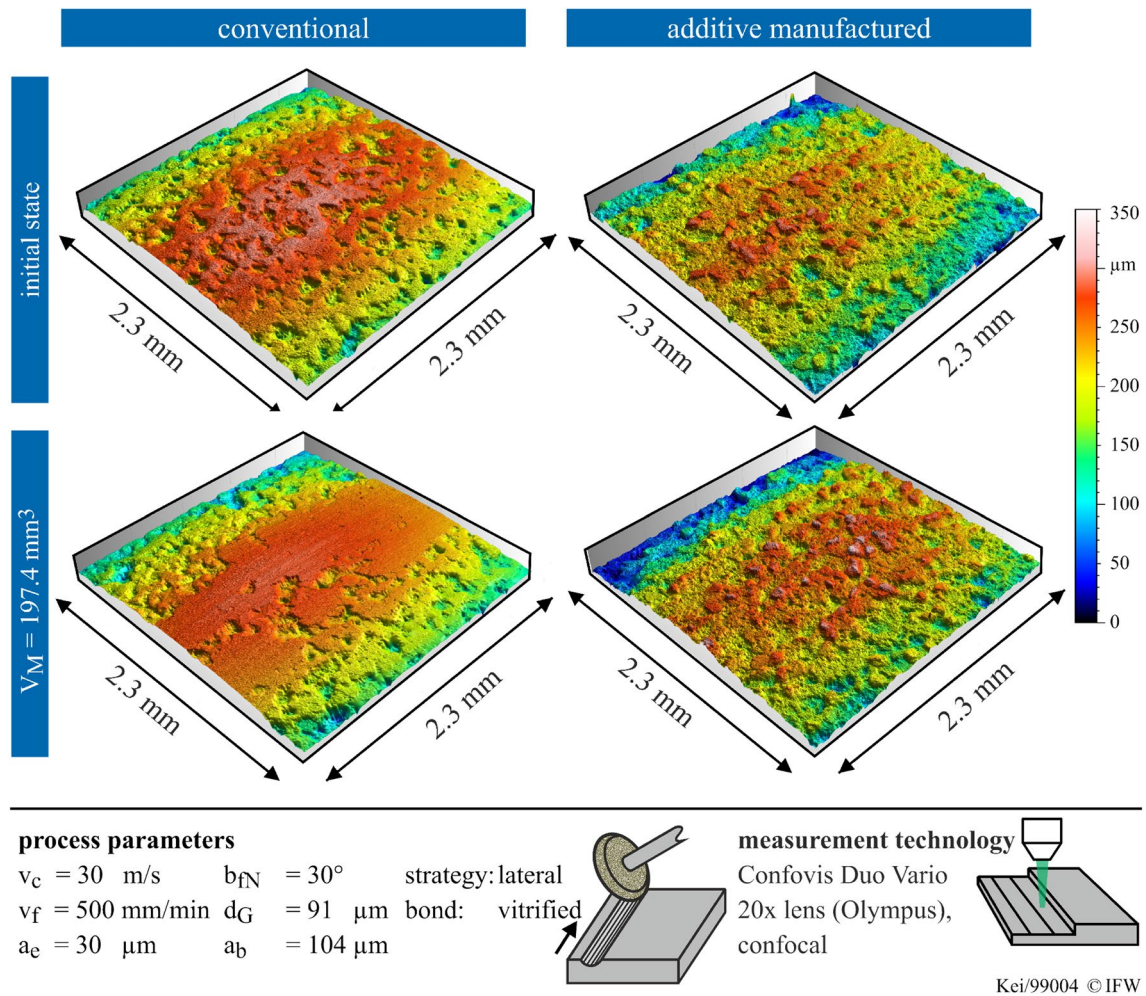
Surfaces of the toric grinding pins after a machined volume of $V_M = 197.4 \text{ mm}^3$
